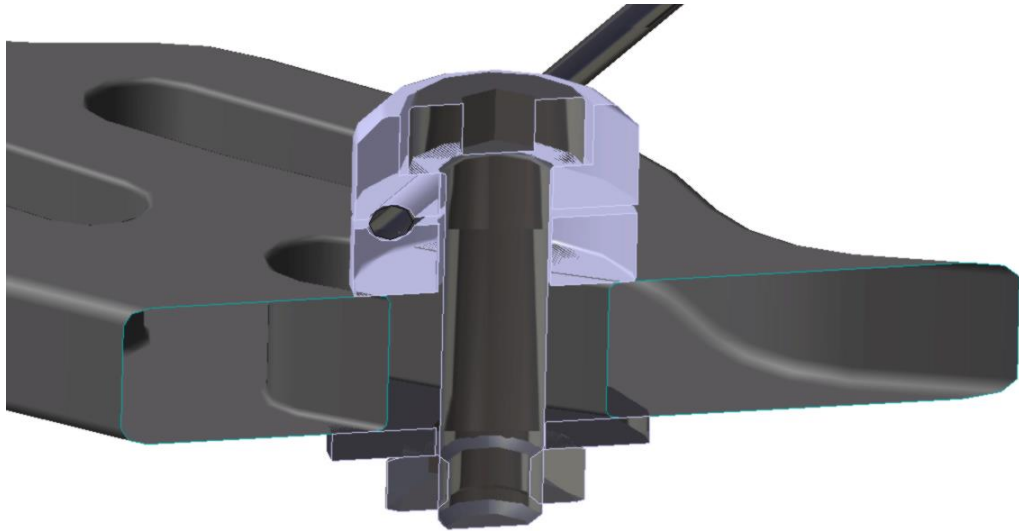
Modified clamping components of Kirschner rod – section view
